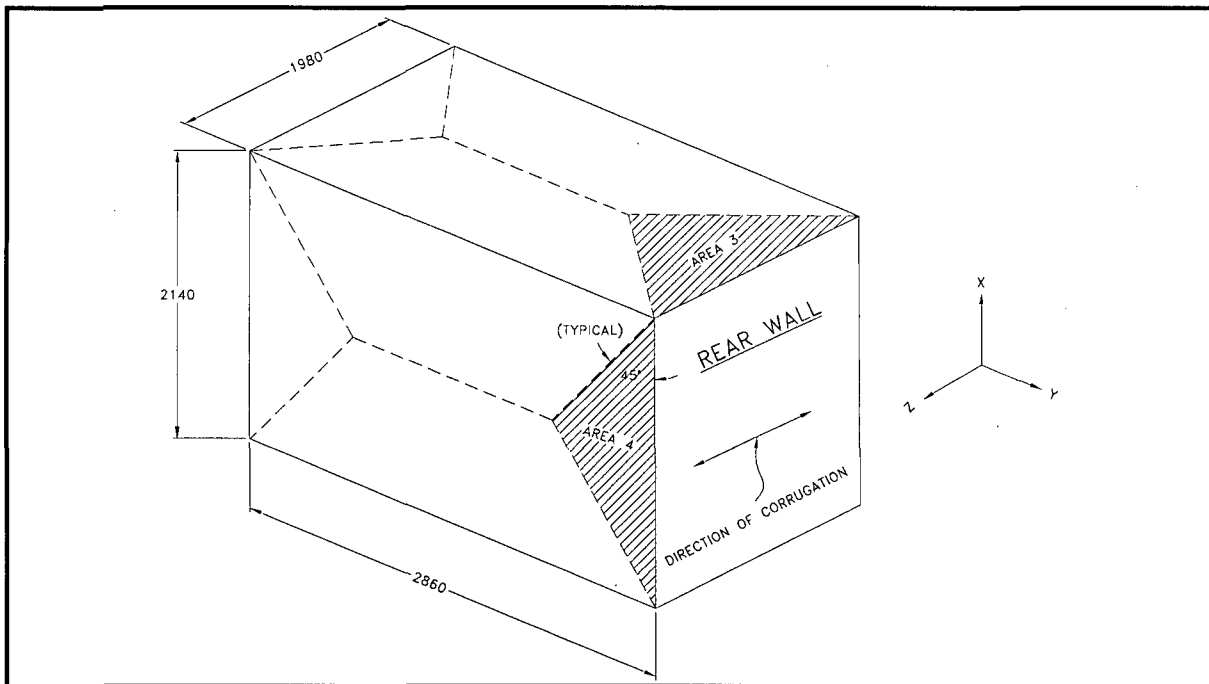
(b) – View of Rear Wall and Adjacent Walls, Showing Areas Used to Calculate Edge Loads for the Rear Wall
